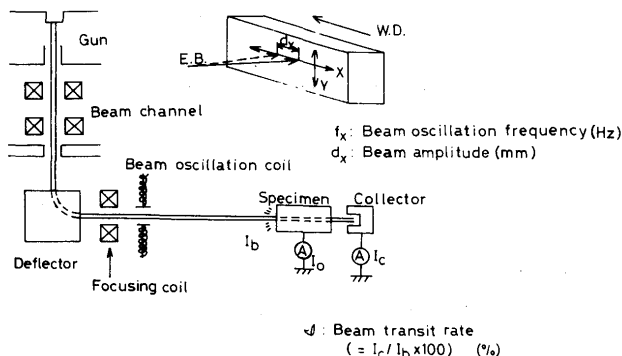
Schematic diagram of horizontal position welding method.
